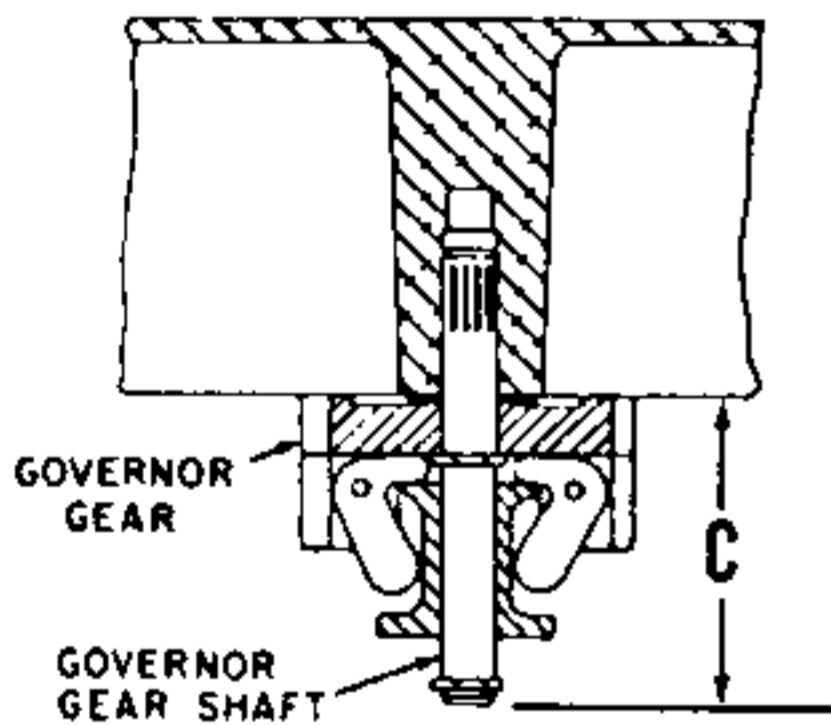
Governor gear and shaft installation on Models VH80 and VH100. Dimension (C) is 1 inch (25.4 mm).
